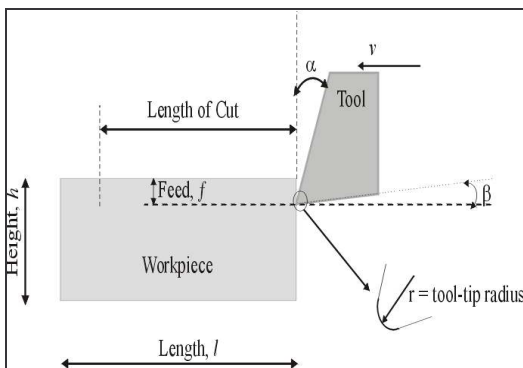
AdvantEdge machining model (α - rake angle, β - clearance angle, v - cutting velocity).
